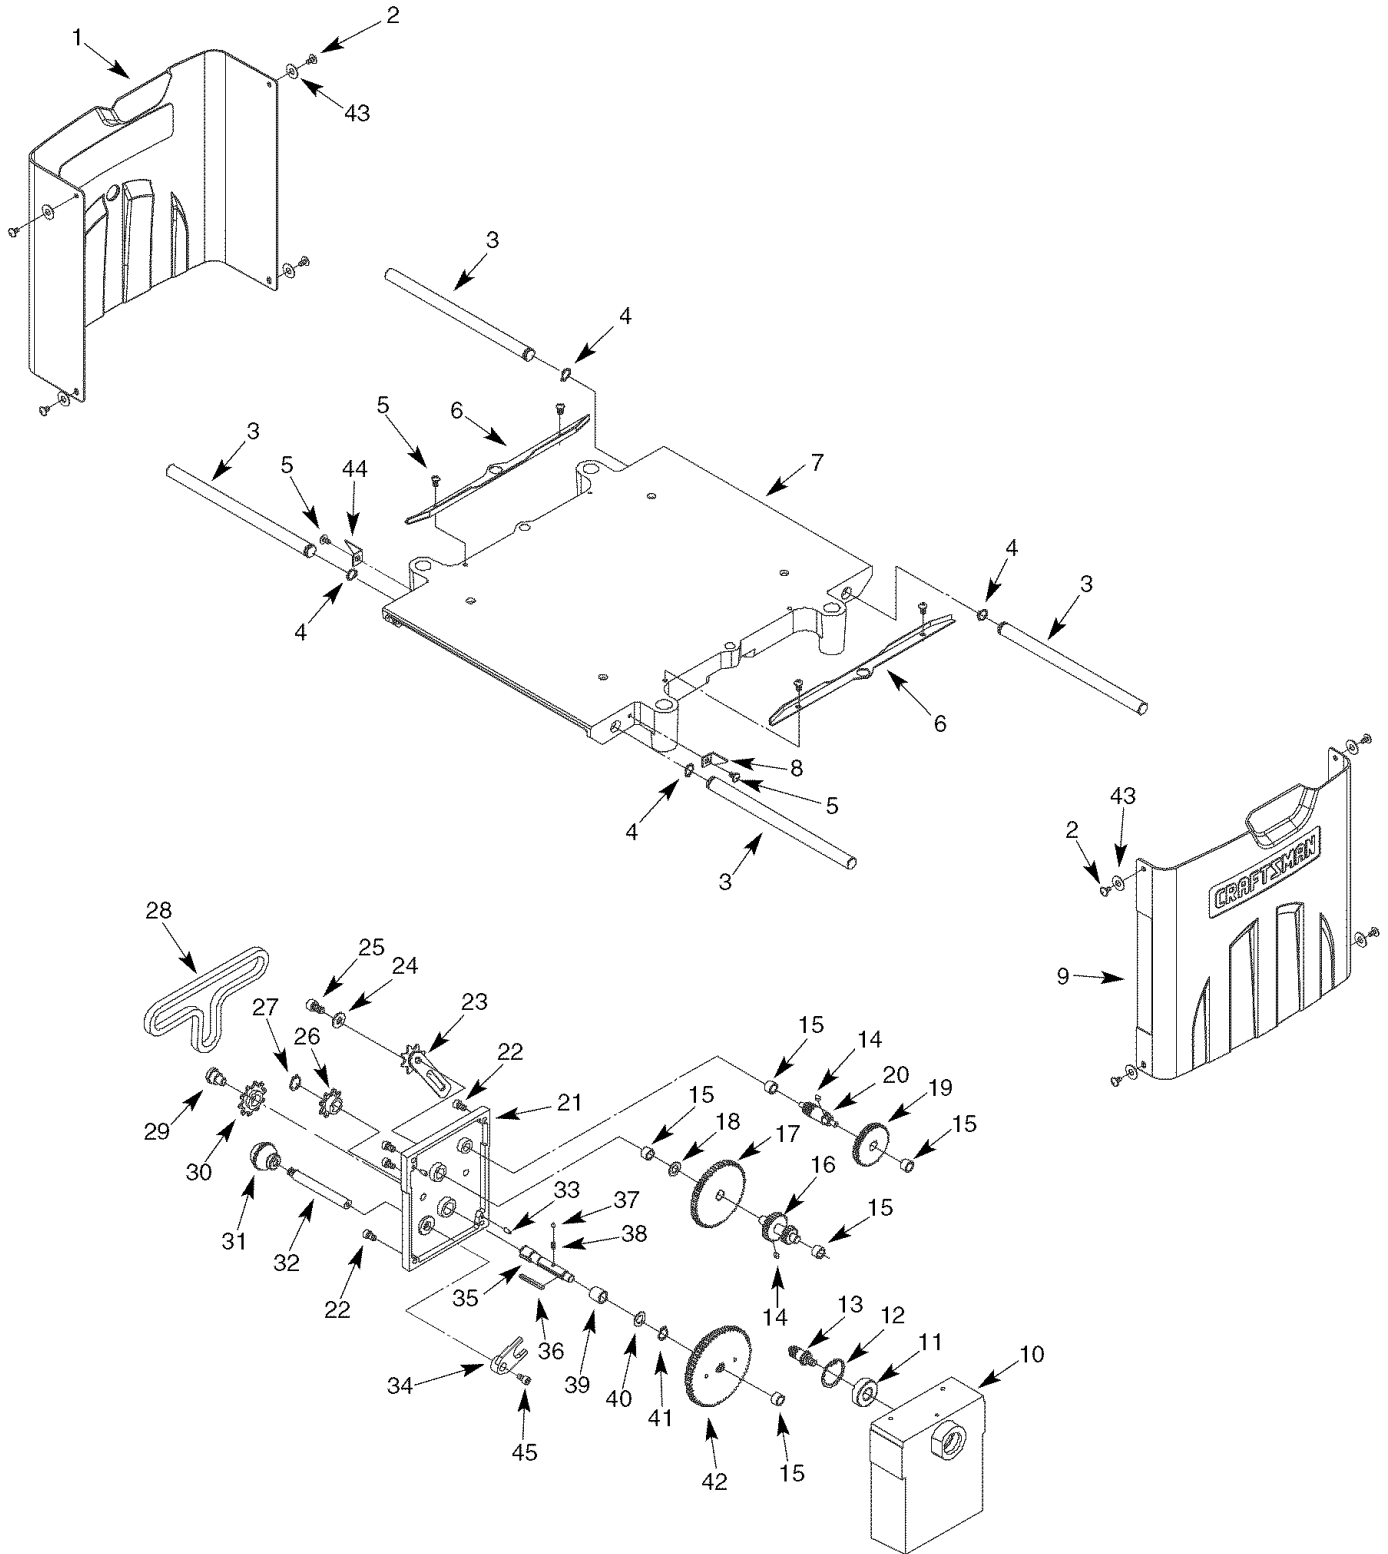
Replacement Parts Illustration for Gearbox and Table
